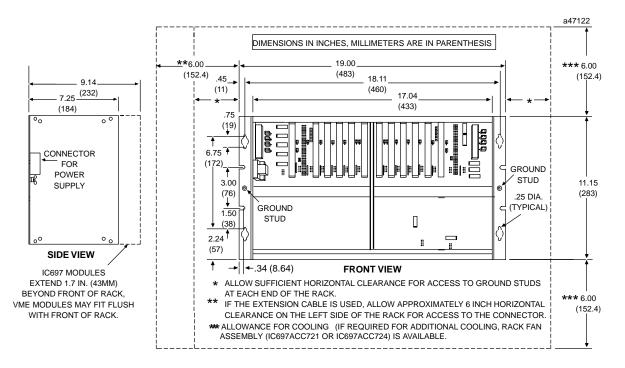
Redundant Rack Dimensions for Rack (Rear) Mount
